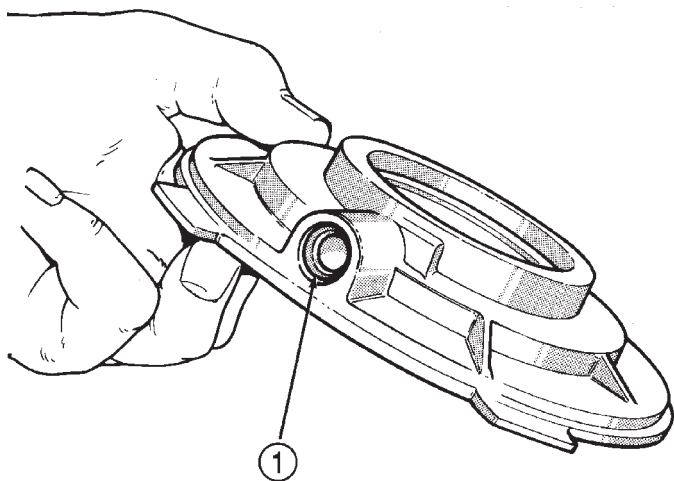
Pickup Tube O-Ring Installation J8921-286
